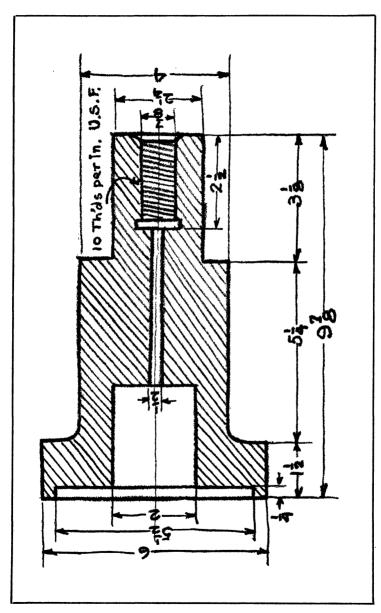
Sketch Made as Illustrated in Fig. 26 with Dimension Lines Added
